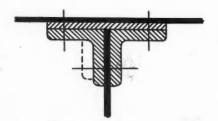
Flange section of the Messerschmitt Me 109 and Me 110 wing spar.
